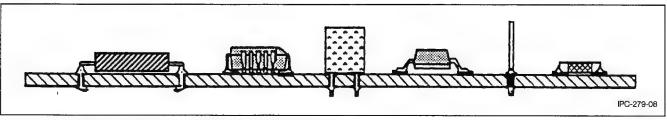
Type 1C Assembly - Mixed Technology Assembly
